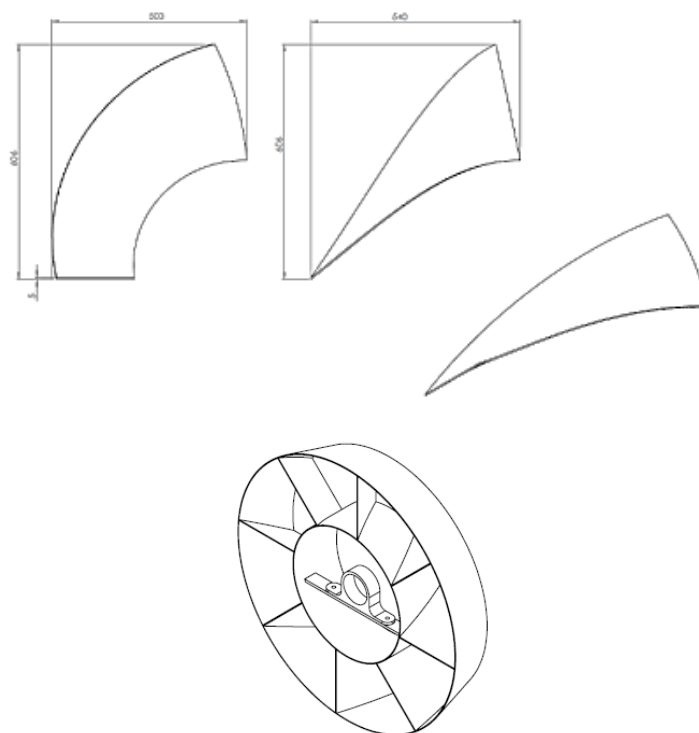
a) Working blades of MHPP; b) General view of the directional channel
